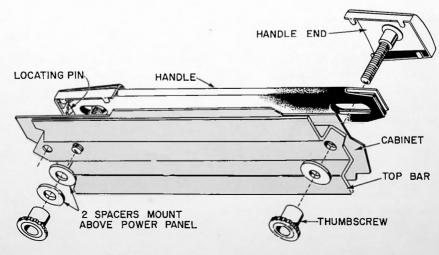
B. DETAIL OF HANDLE ASSEMBLY
